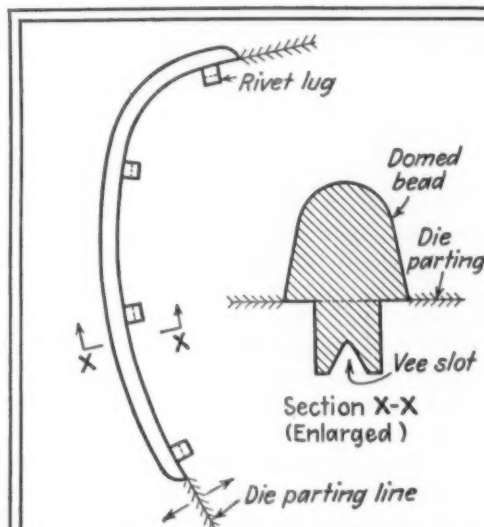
Decorative zinc alloy beading replaced light gage aluminum pressing, gave stronger, cheaper part.
